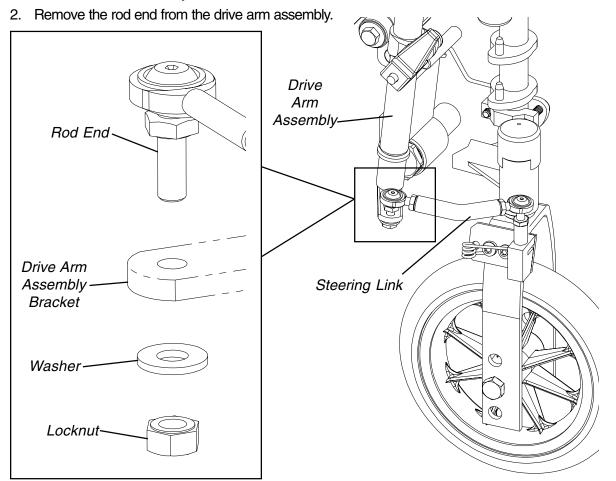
REMOVING/INSTALLING STEERING LINK
